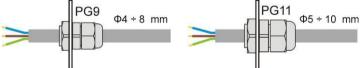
Recommended types and sections of installation cables PG9 and PG11 for cable glands.
